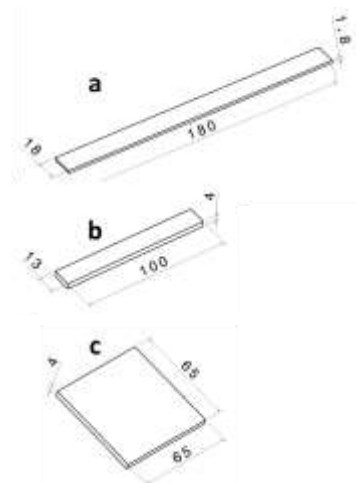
Core dimensions of test specimens in mm a) tensile test specimen, b) three-point bending test specimen and c) drop weight impact test specimen.
